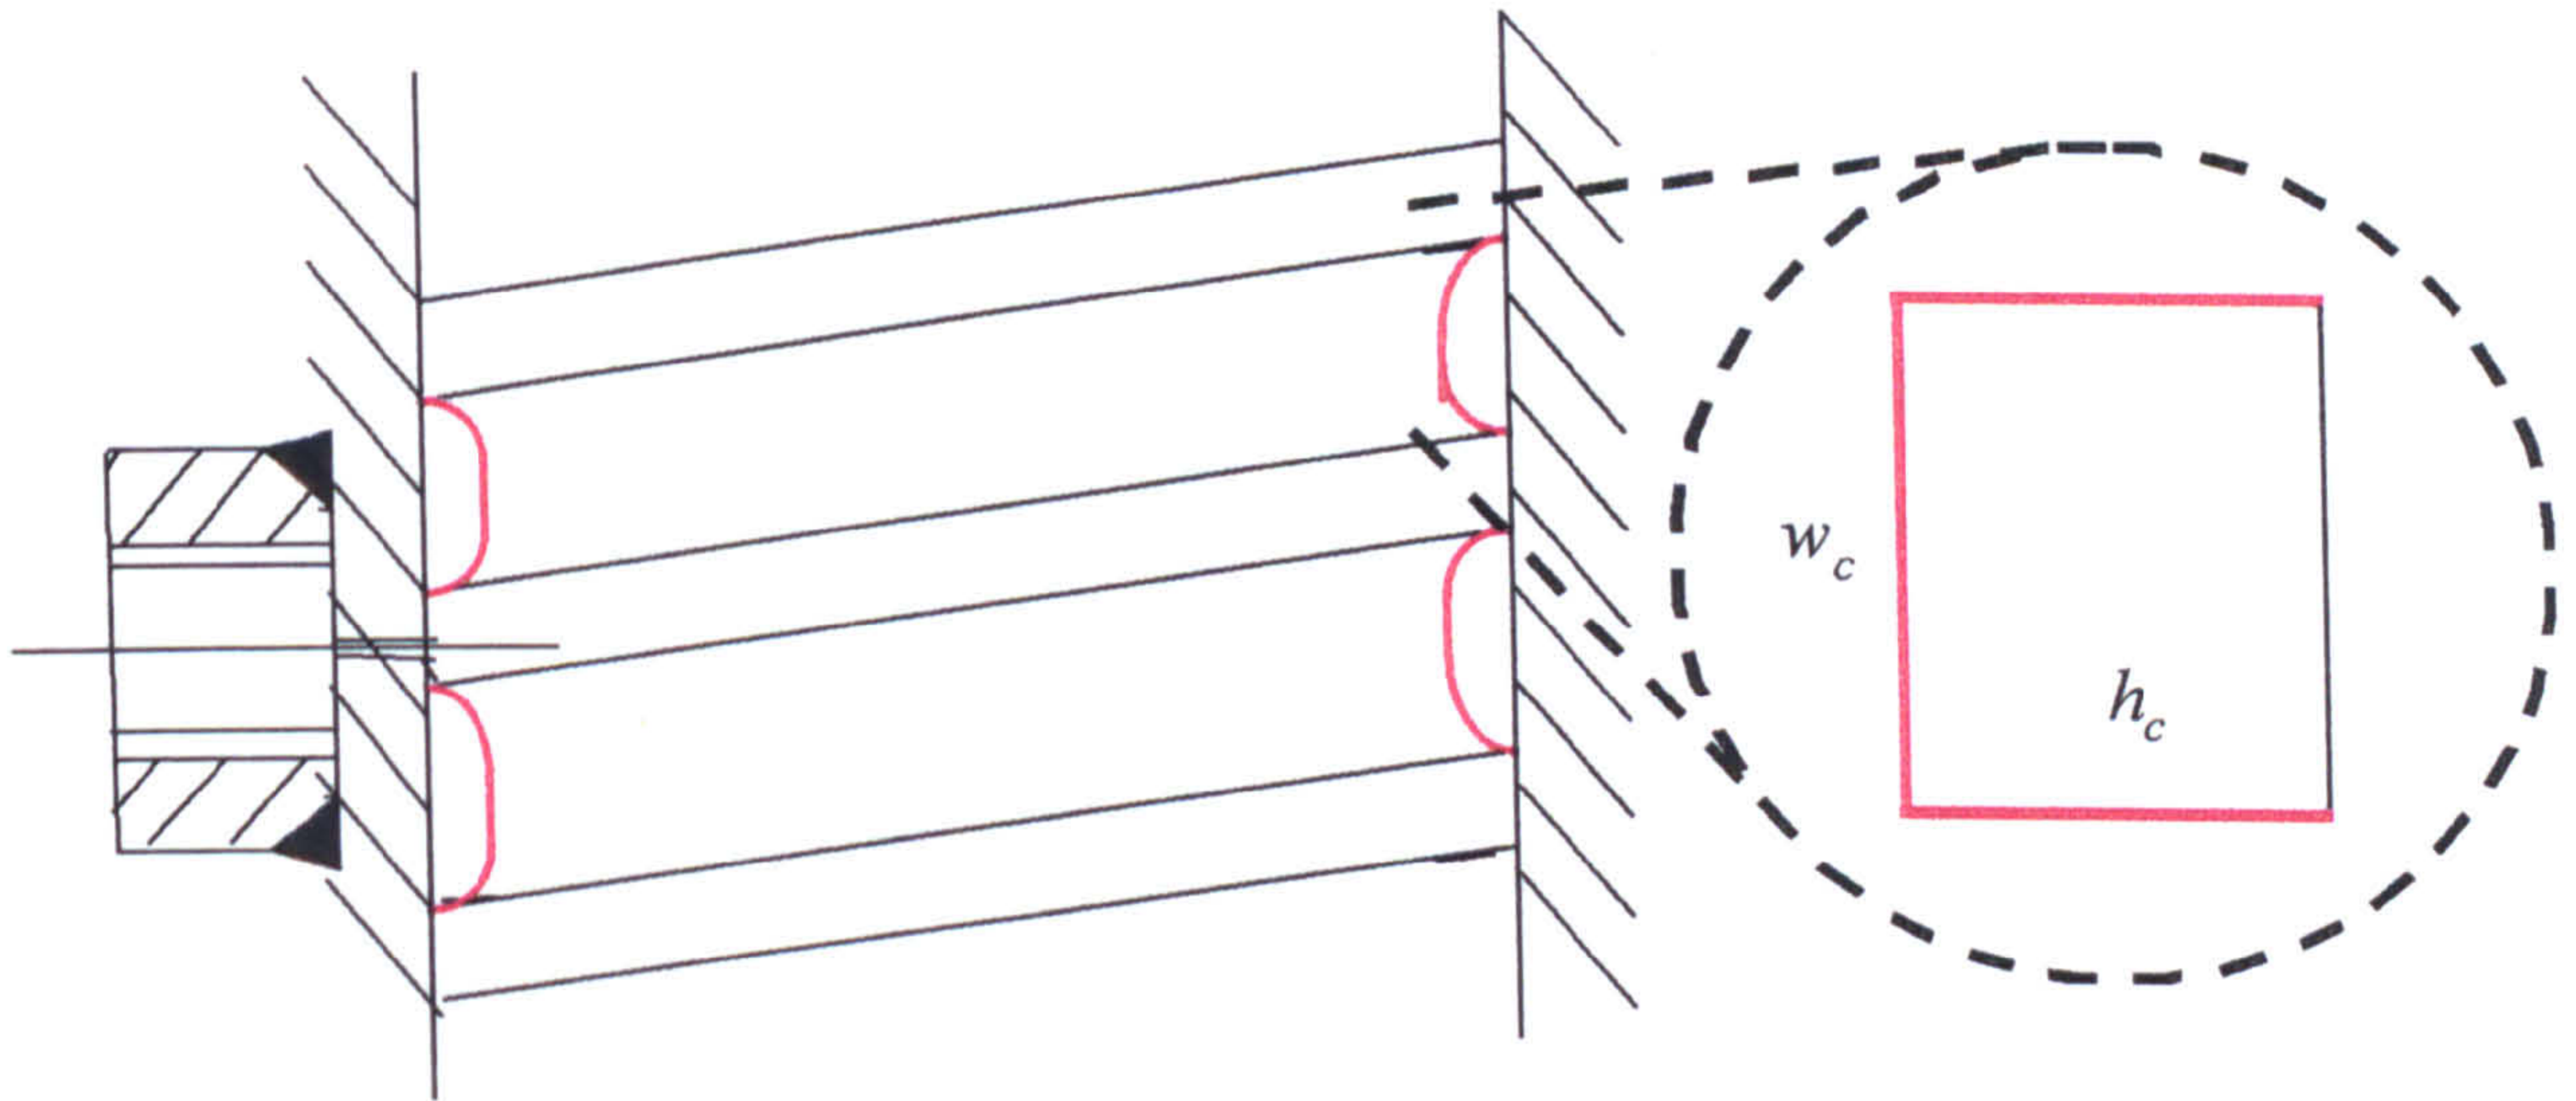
The heat transfer surfaces of the coolant flow channel.
